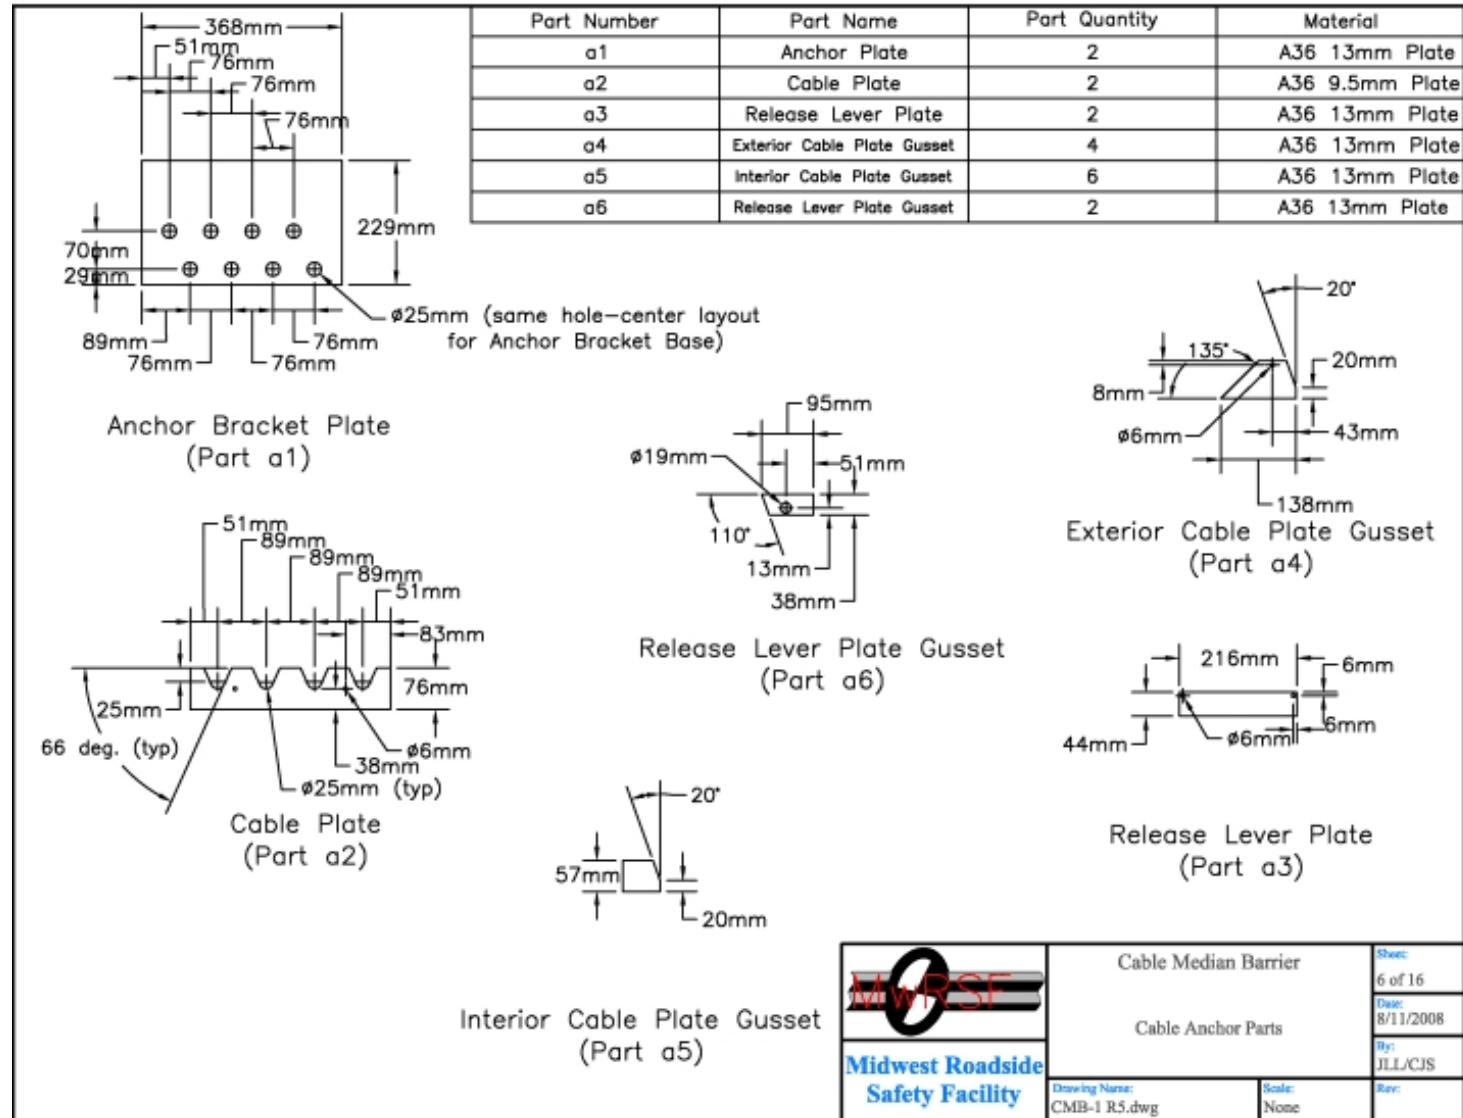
Cable Anchor Bracket Parts, Design No. 1
